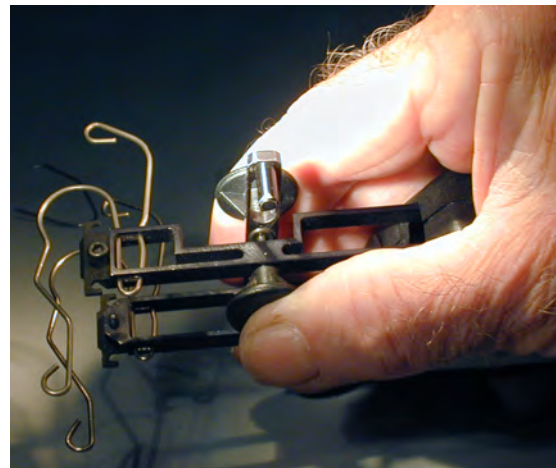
Press buttons to engage cup and cone. Be sure you see the alignment.
